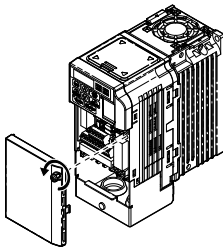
Remove the Front Cover on a NEMA Type 1 Drive
